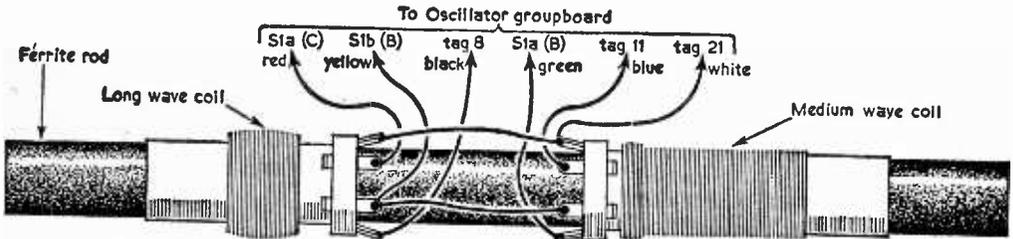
The connections to the coils on the ferrite rod aerial assembly.
